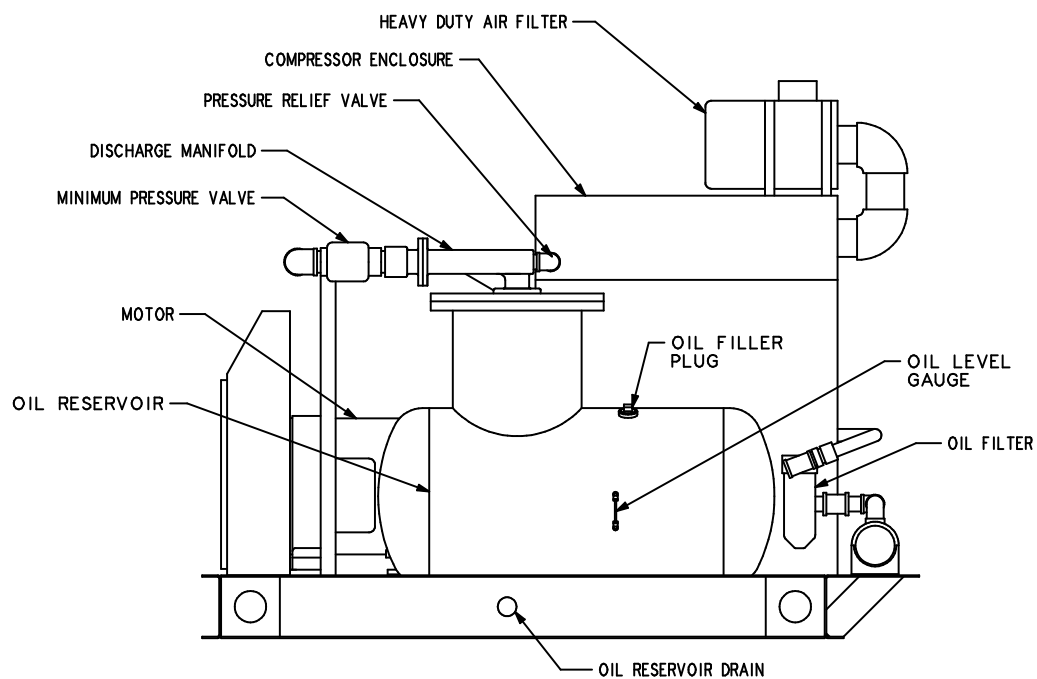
PACKAGE - UNIT WITH WATER COOLED AFTERCOOLER
